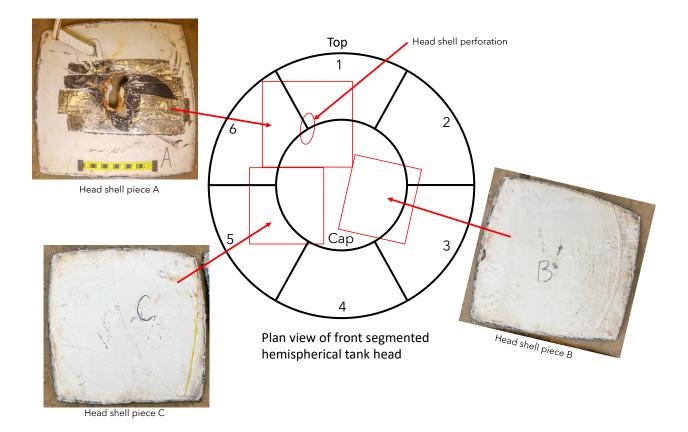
Plan view of the front of the cargo tank semitrailer showing the location of the buttwelded panels. The panels have been arbitrarily numbered for references purposes. The locations of the removed head shell pieces A, B and C are also shown for reference (external side shown). The location of the perforation in the head is shown; it occurred where the segment 1-6 butt weld met the cap butt weld.
